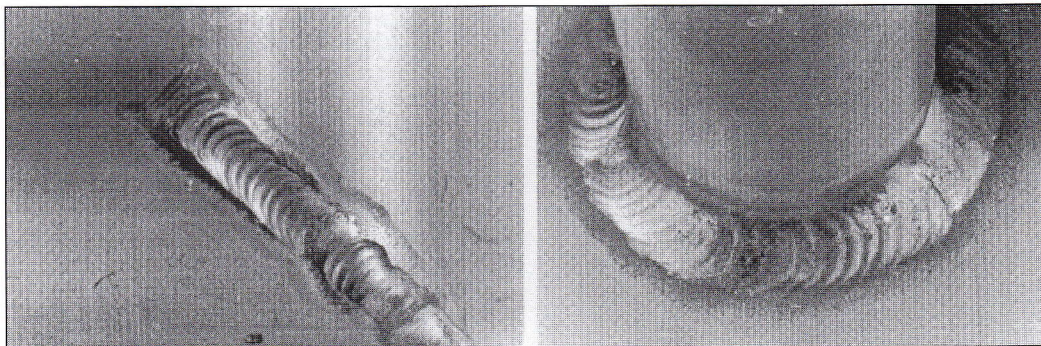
Macroscopic view of the pipe-to-pipe and of the pipe-to-plate welded joints.
